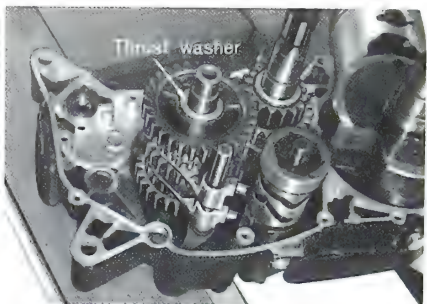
Inserting shifting fork into the fourth and top driven gear
